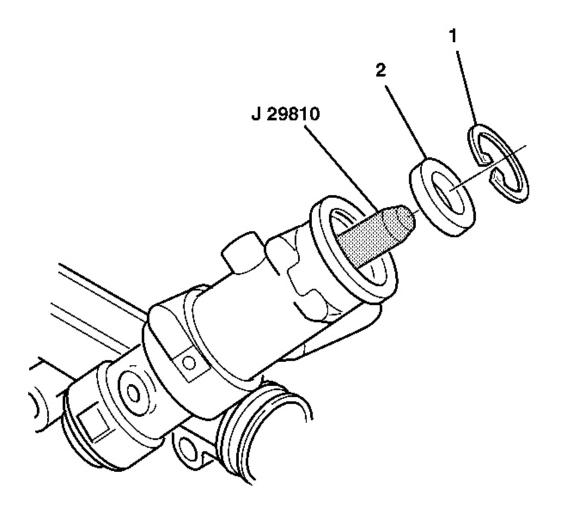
View Of Retaining Ring, Stub Shaft Seal & Rack & Pinion Gear Assembly Courtesy of GENERAL MOTORS CORP.
